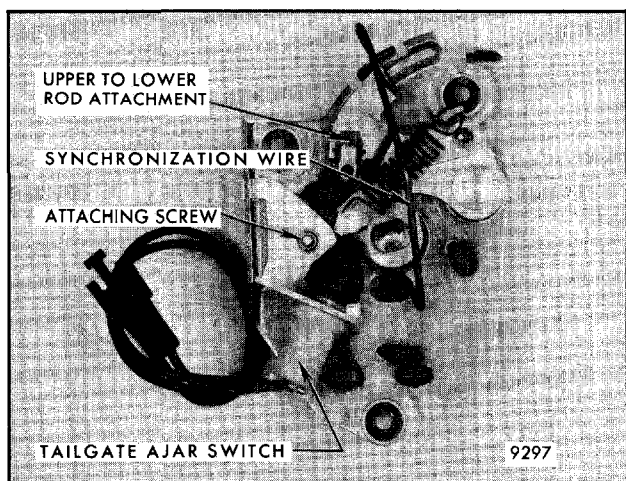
Tailgate Left Lower Lock Assembly
